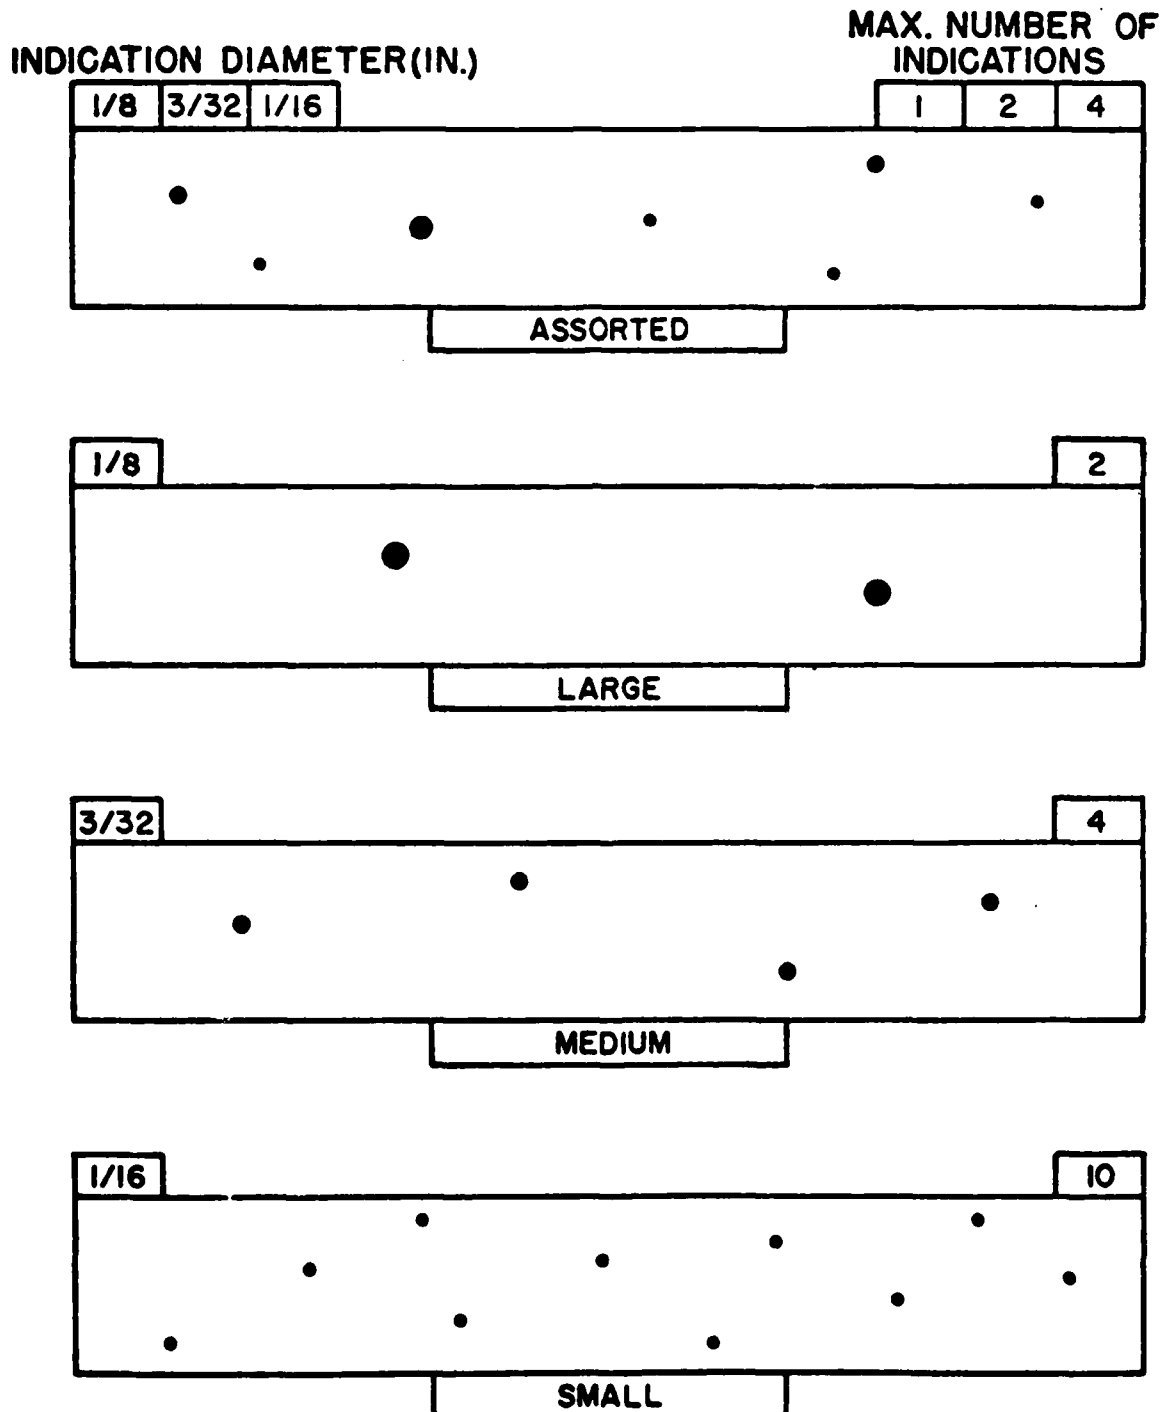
Class 2 Weld Surface Inspection Standards for Scattered Rounded or Non-Linear Indications (Sheet 6 of 6).
